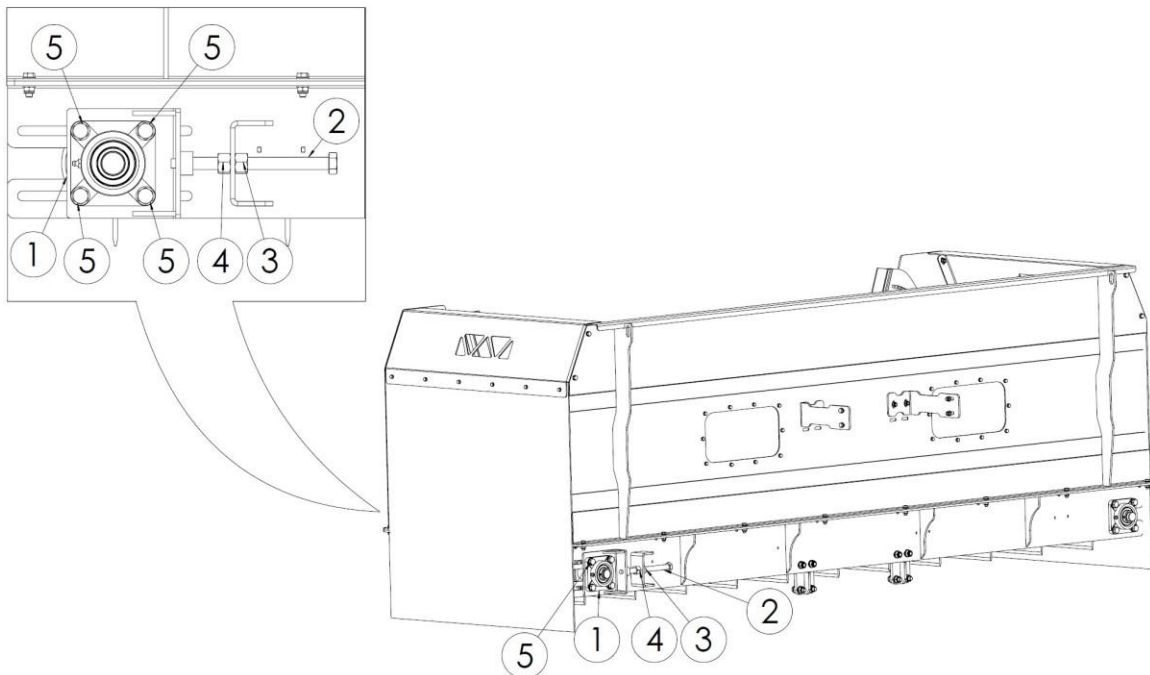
Conveyor belt tensioning: 1 - tensioning element, 2 - tensioning screw, 3 - tensioning nut, 4 - nut, 5 - screw connection of the conveyor shaft bearing
